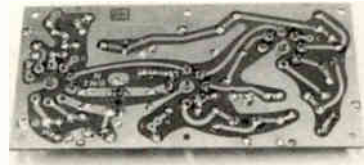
Foil side of an etched circuit board, showing the parts installed.
